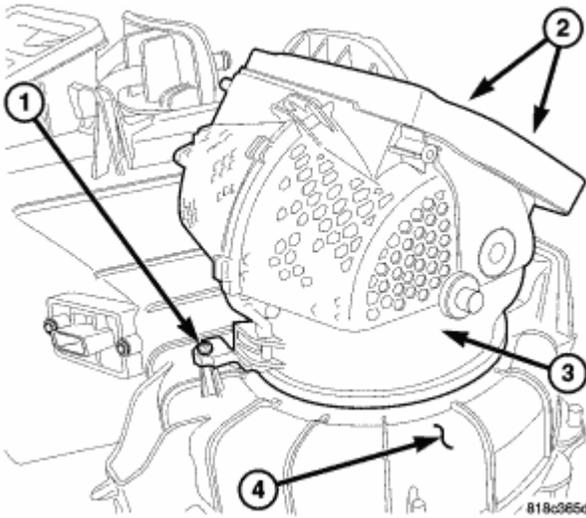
Screw, Plastic Retaining Tabs, Air Inlet Housing & HVAC Housing
